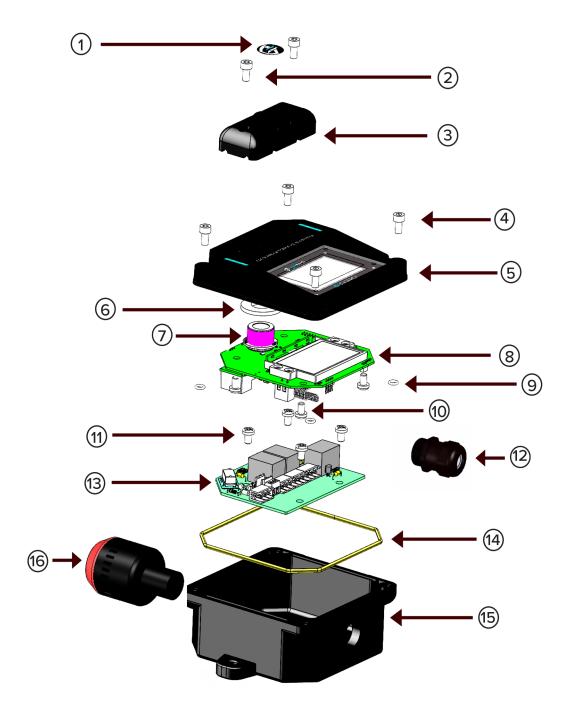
D-Guard<sup>2</sup>S replacement parts - exploded view.
